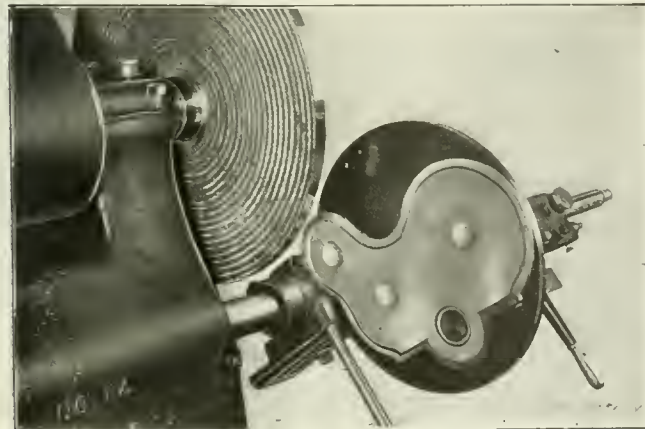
Grinding Automobile Gear-case Covers; Rate, 30 per Hour
